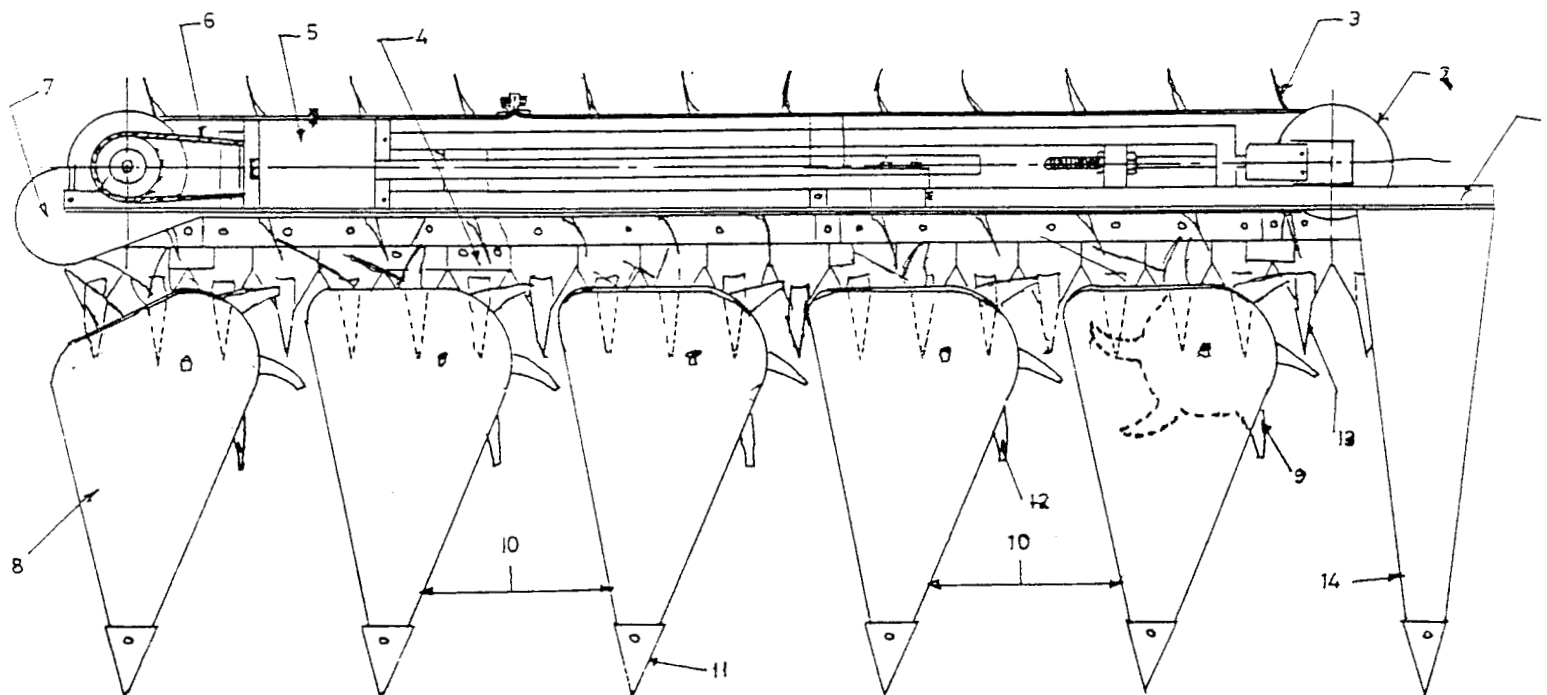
MAIN ASSEMBLY OF THE REAPER UNIT
